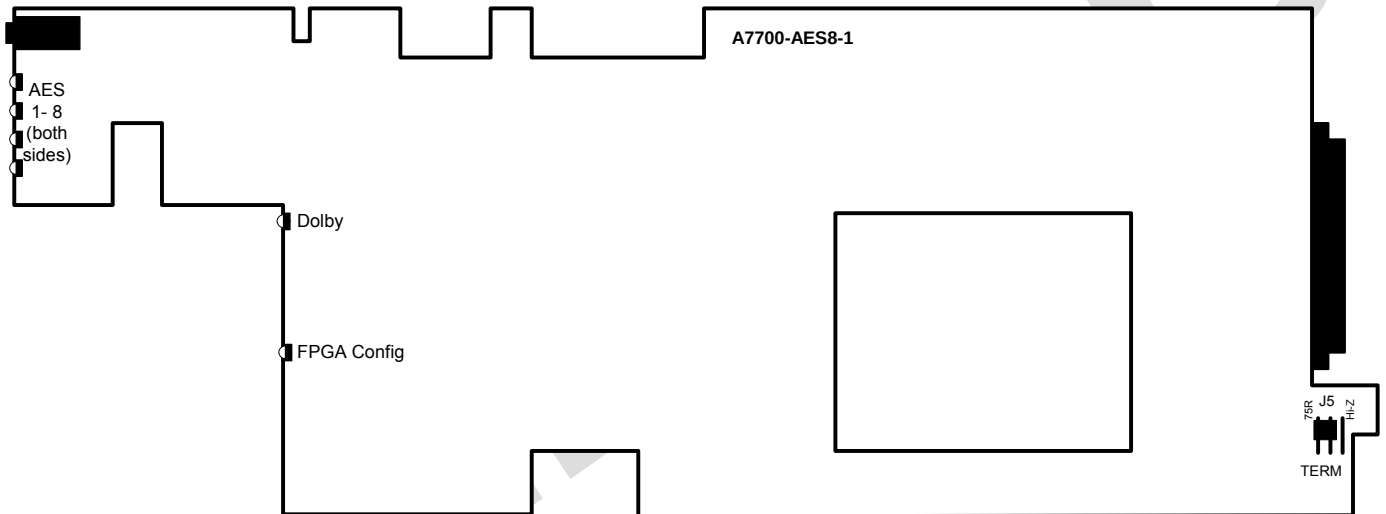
Location of Jumpers/LEDs – Rev. 1 Sub Board
